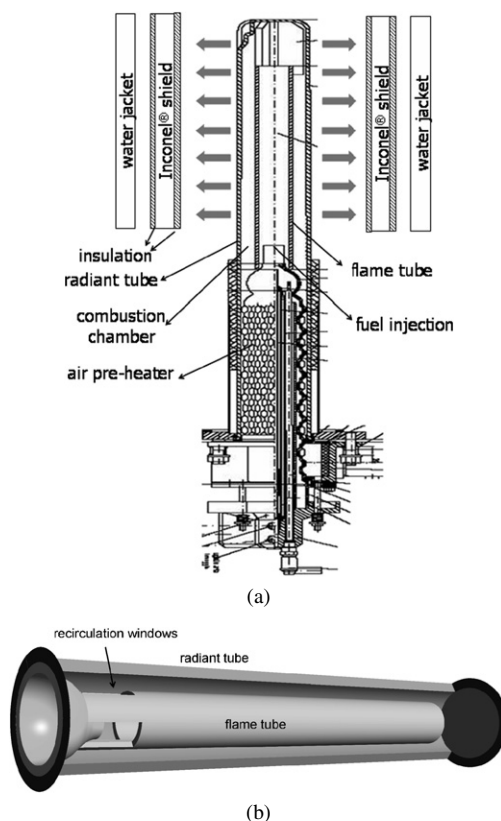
(a) Longitudinal section of the burner and (b) 3-dimensional view of the combustion chamber.
